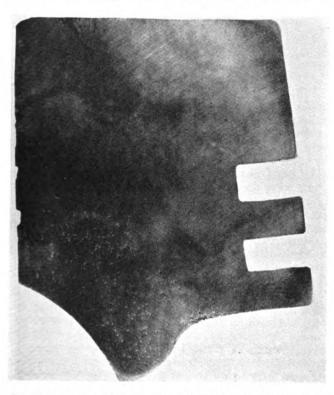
Enlarged section of a piston before being acetylene welded
